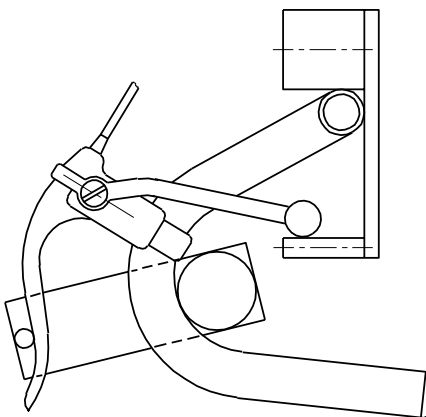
Method of fitting the gauge to the handbrake-lever and handlebar
